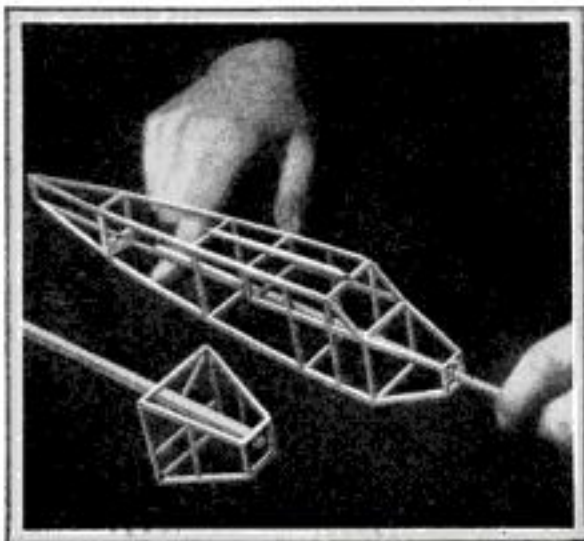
Two methods of attaching the motor stick so that it can be readily removed.
